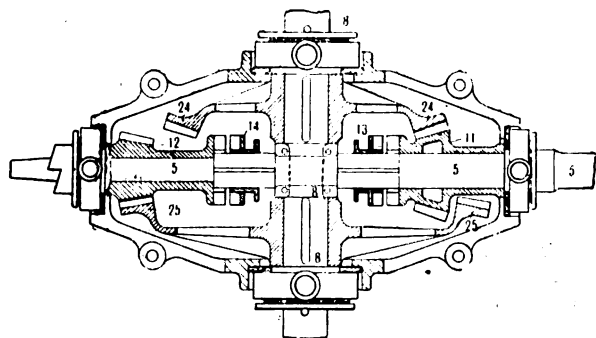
HORIZONTAL SECTION THROUGH GEAR BOX.
